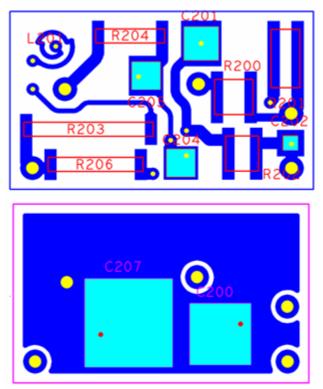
Layout Files for EP Module Inner Layers top – Upper core Layer; bottom – Lower core Layer
